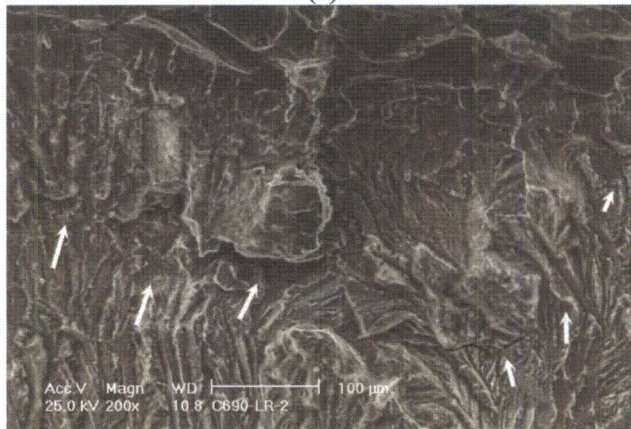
shows additional examples of secondary cracking 50-70 μm from the crack front at the end of the test. By comparison with the seemingly isolated cracks observed on the fracture surface of specimen C690-CR-1 (see, for example, Fig. 55), the cracks here are extensive and may be due to the increased test temperature during the portion of the test when this cracking occurred.
